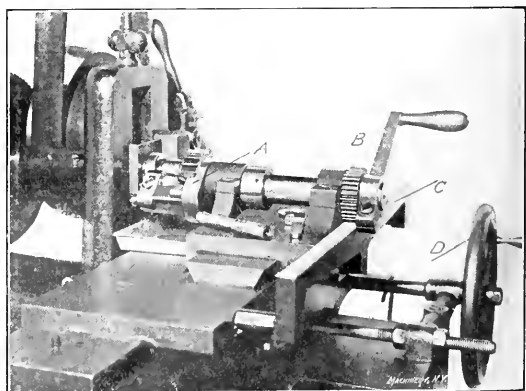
Rotary Milling on the Barrel. A Special Fixture Rotates the Barrel while Cut is Taken.
